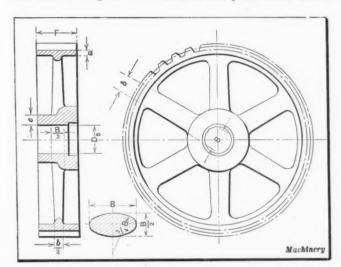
Design of Gear employed on Punching and Shearing Machines tuting the known values in the foregoing equation we have:
